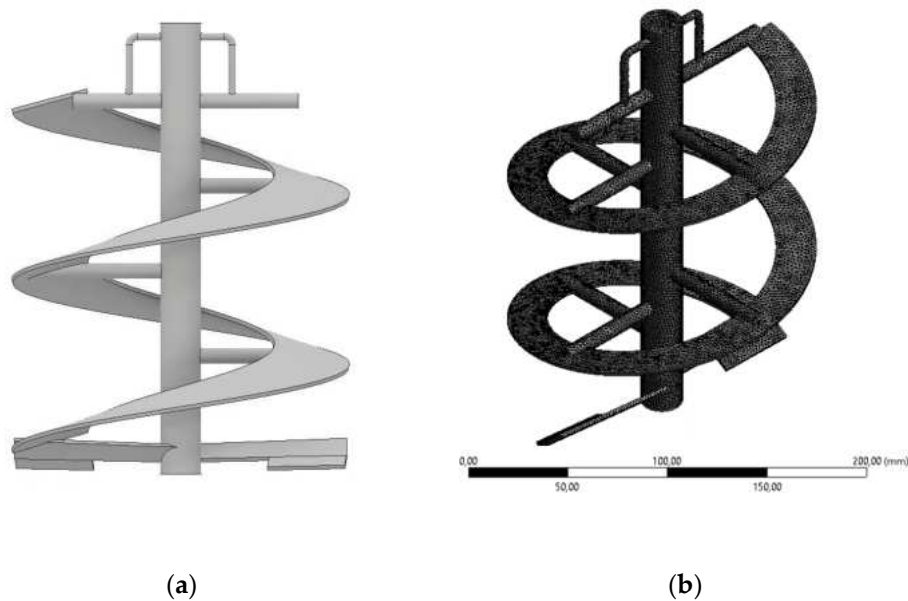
2D geometry (a) of impeller and Isometric view (b) of the tetrahedron elements of the helical ribbon impeller.
